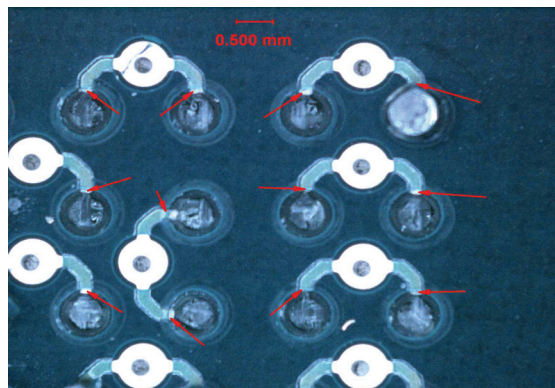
Tin Silver Copper (SAC) Pry and Dye Failure Analysis, U6 PCB Trace Failures
